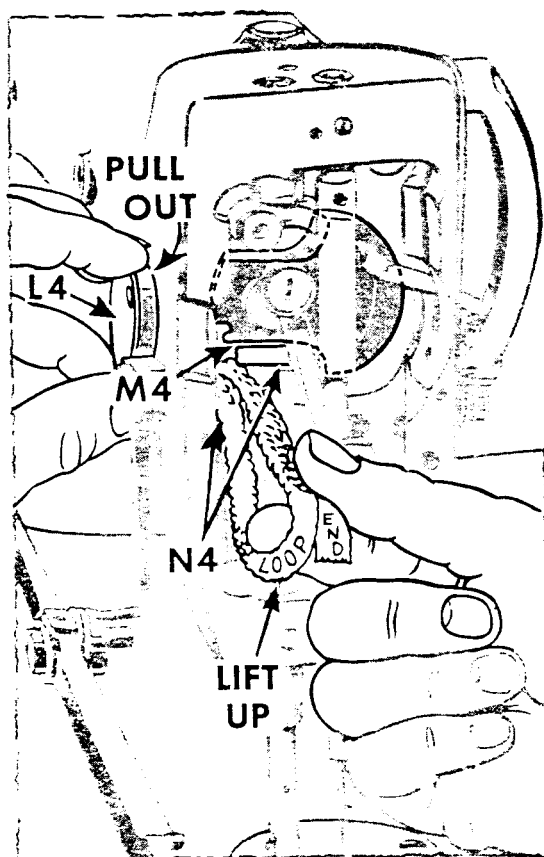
Removing Oil-Removing Wick Assembly 147056
